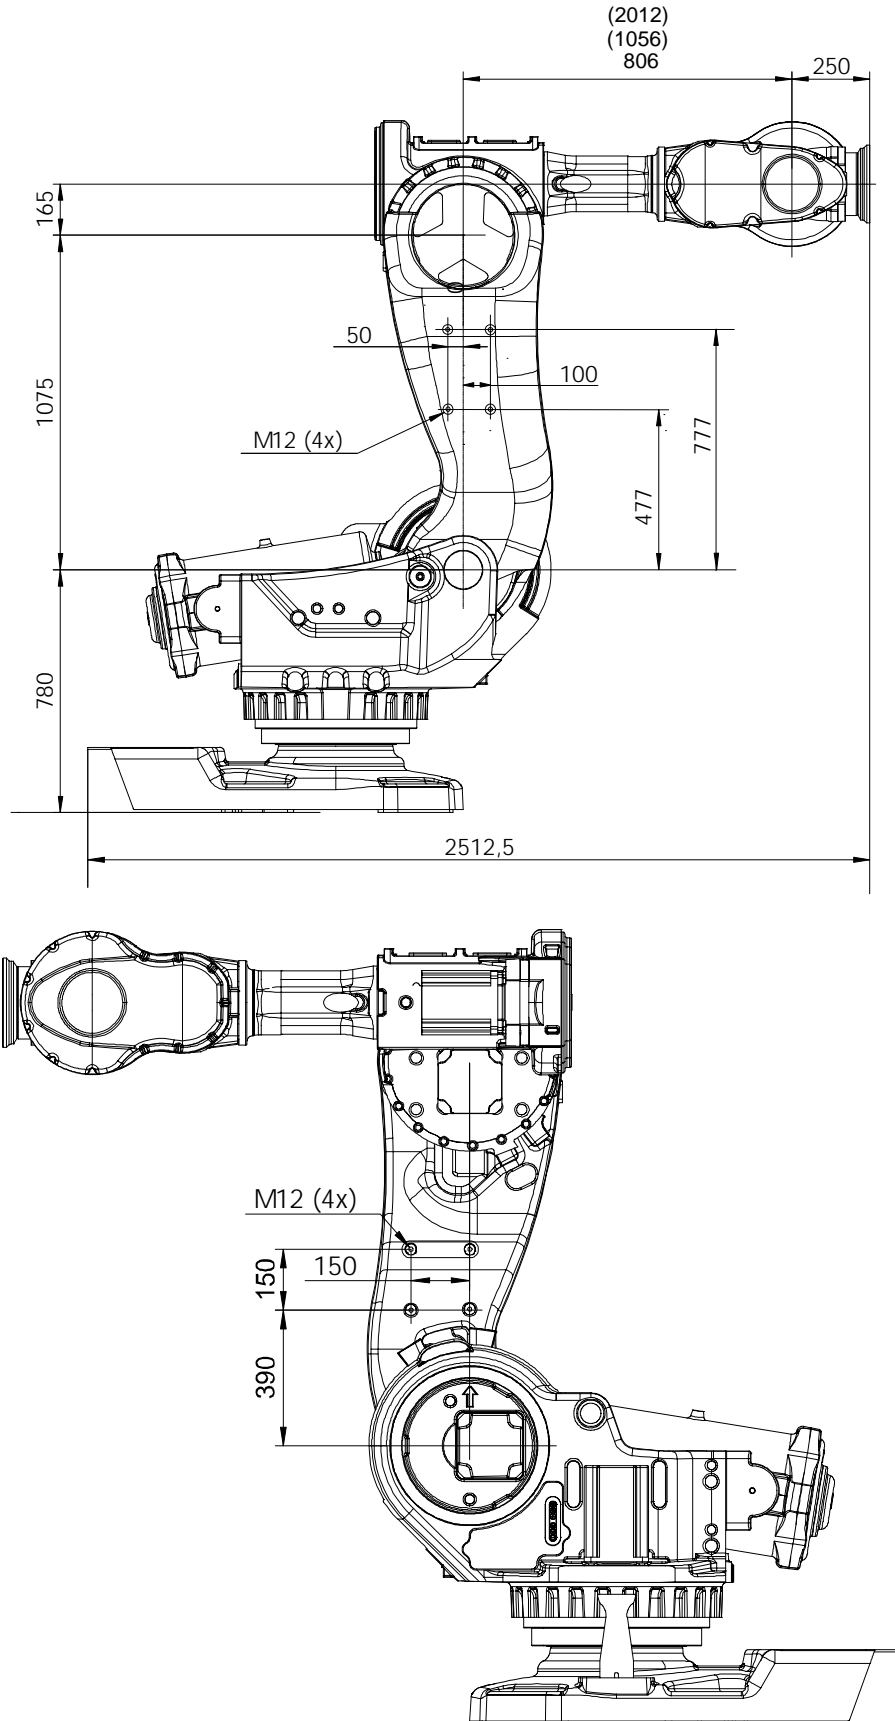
Holes for mounting extra equipment on the upper and the lower arm (dimensions in mm).
